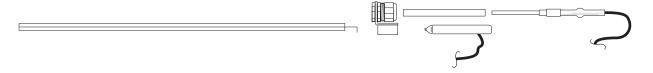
Exploded View of CS505 and CS205 Mounting
